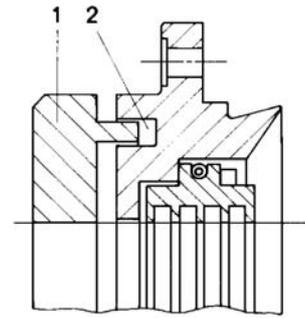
Labyrinth seal combined with dust flinger, type 11, protection IP 54
